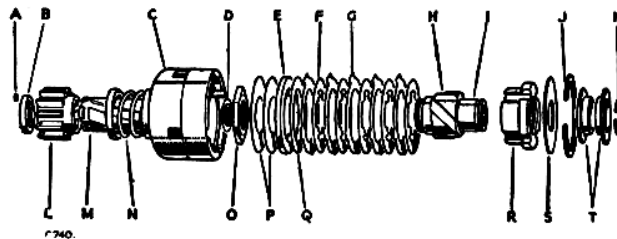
Exploded view of starter drive assembly, Diesel models.
